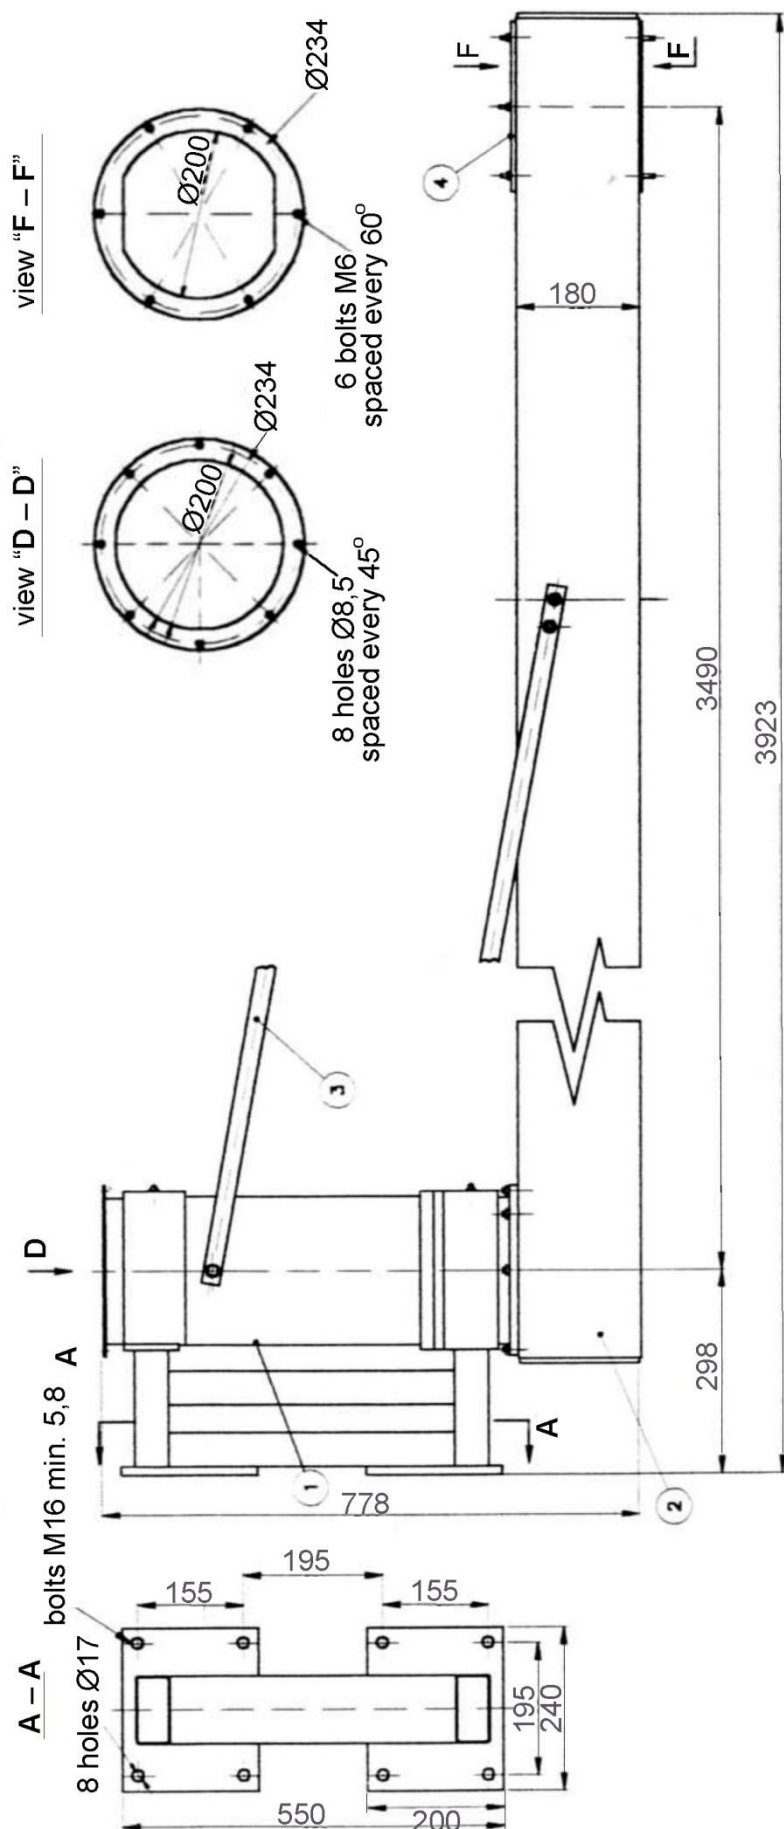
RO-4-E-D – Dimensions, Structure
